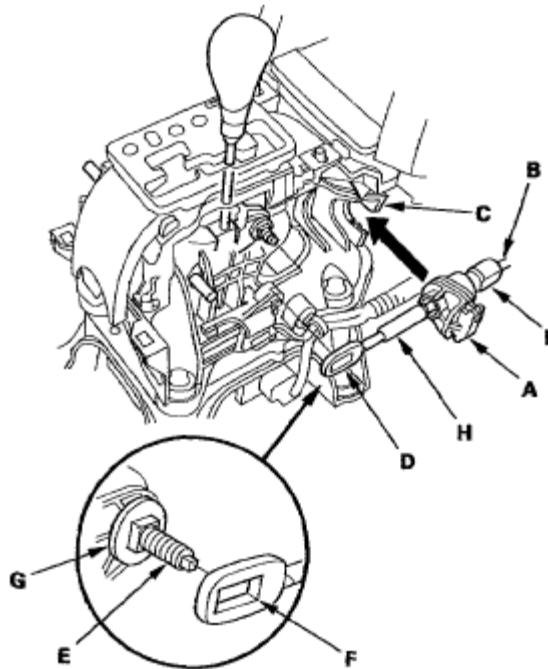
Sliding Shift Cable Socket Holder Into Bracket Base
